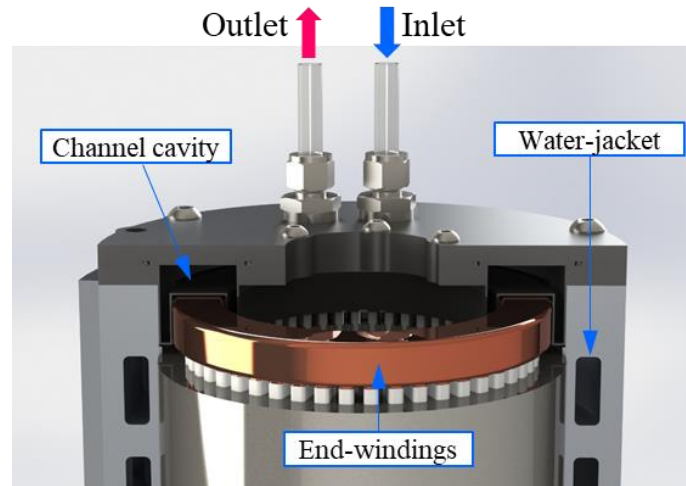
Cross-sectional view of the final assembly of the end-winding channel and the Nissan Leaf motor
